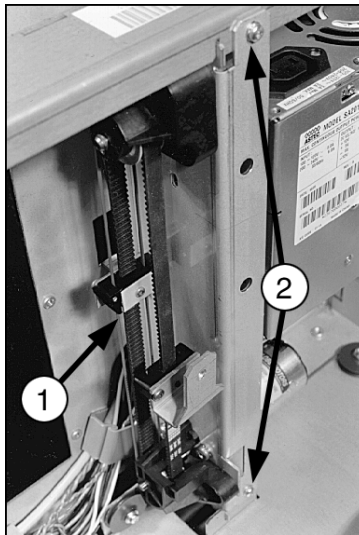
Vertical Drive Assembly Rope Coupler and Assembly Mounting Screws
